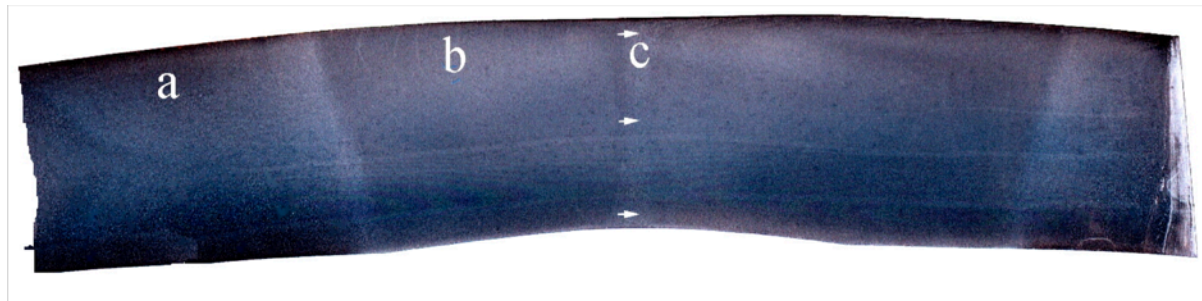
Weld joint segment after post welding heat treatment (PWHT). The pipe is about 1 cm thick. 'a' represents the base metal, 'b' the broadened affected zone and 'c' identifies the original location of the weld.
